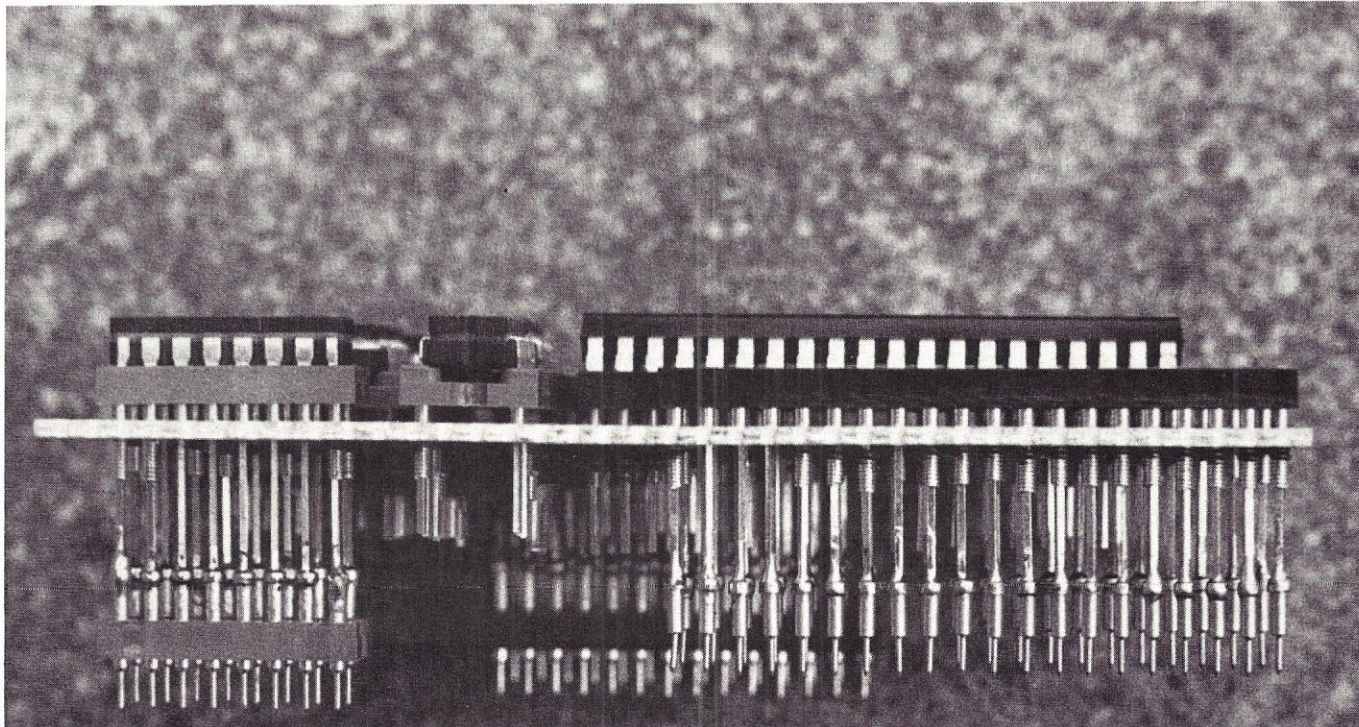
Side view of adapter board shows the frameless socket pins attached to the ends of the wire-wrap pins, using an ordinary
